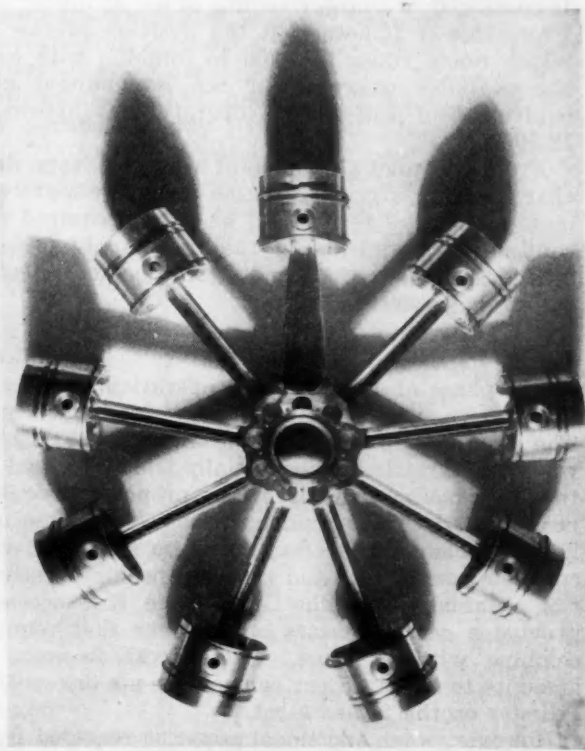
CONNECTING-ROD AND PISTON ASSEMBLY
